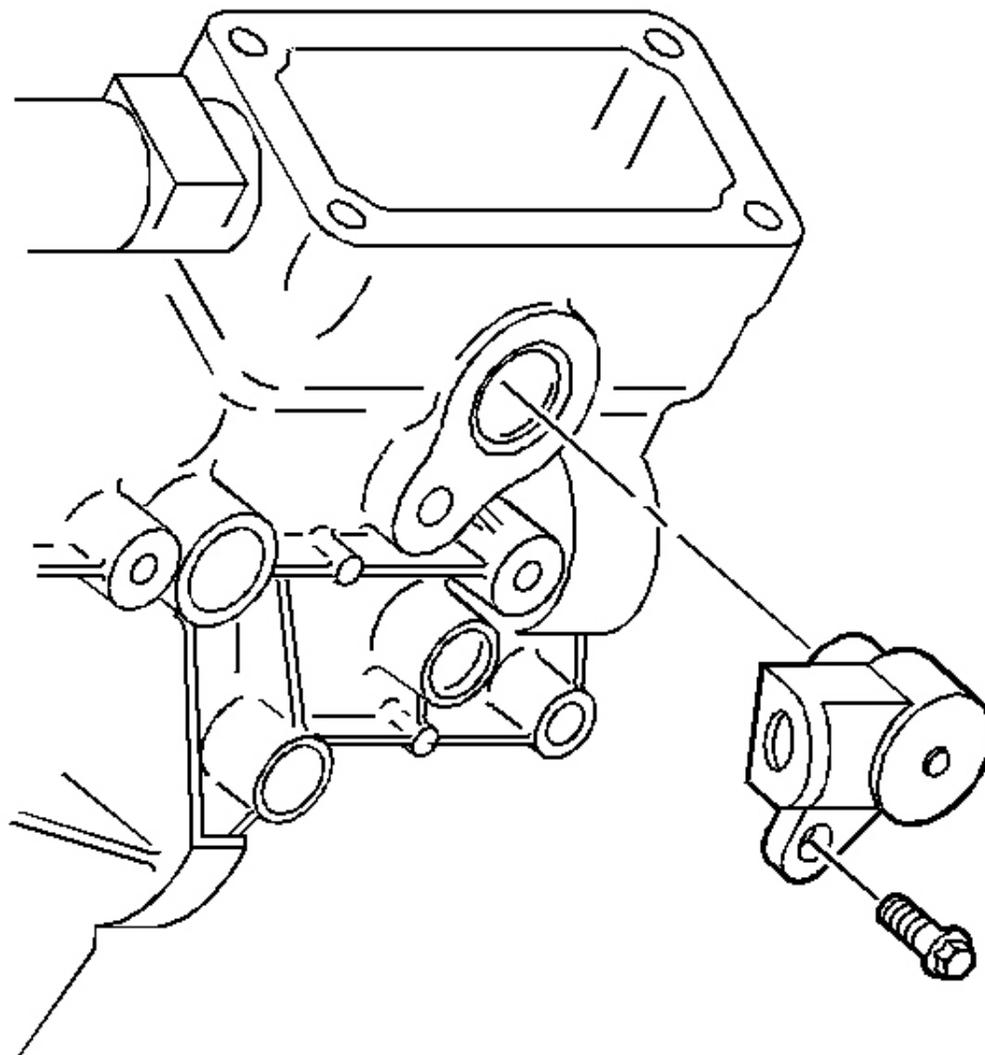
Installing Reverse Lockout Body & Bolt To Extension Housing
